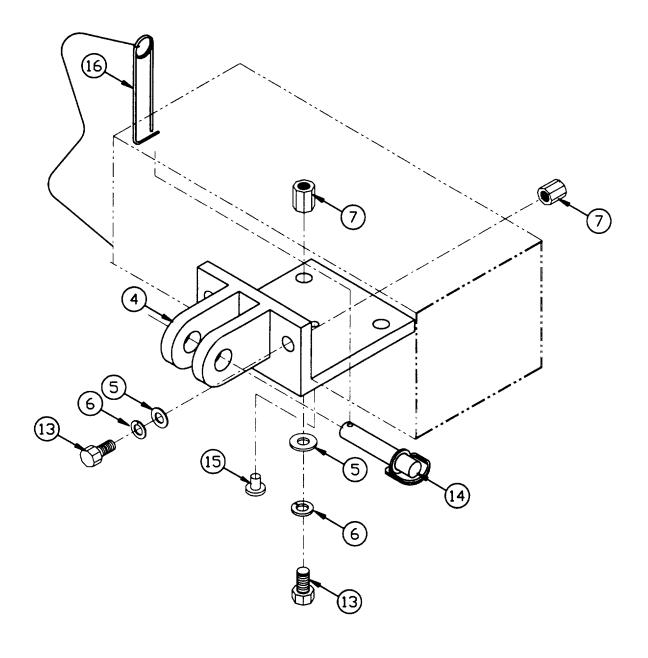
STEP AND LADDER ASSEMBLY (SHEET 3 OF 4)
